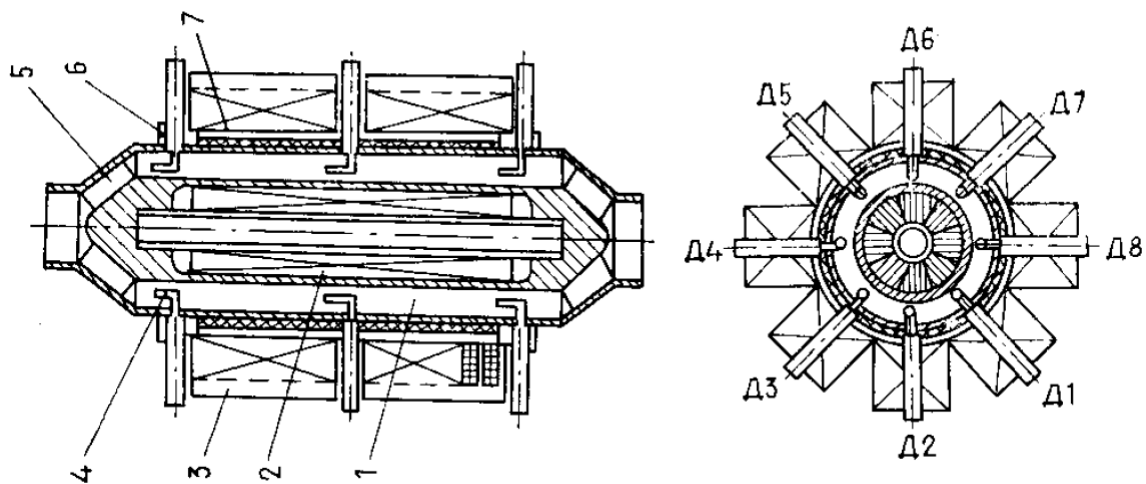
A drawing of experimental ALIP equipped with Pitot tubes in the channel. [22]
